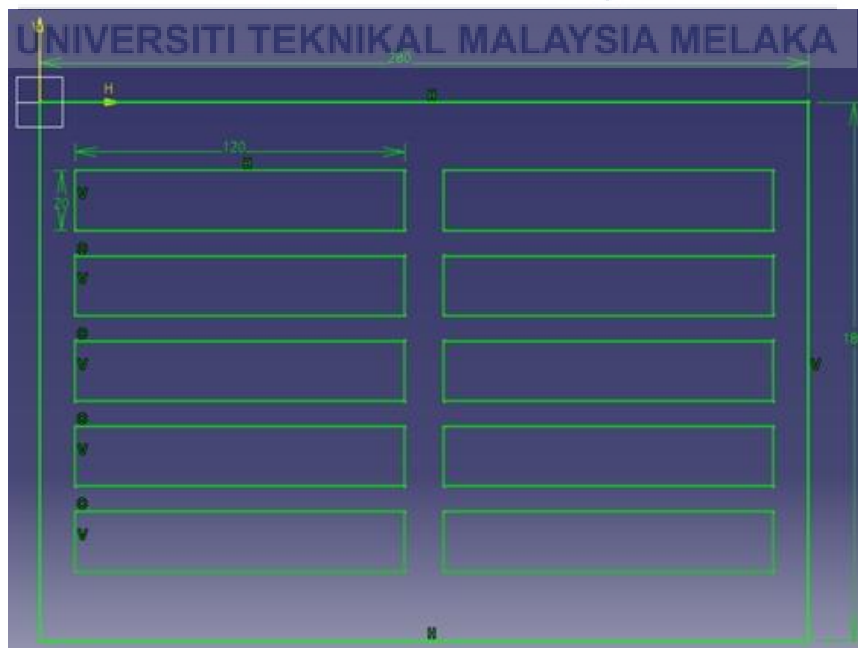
Dimension Size of Specimen Flexural and Tensile Testing
